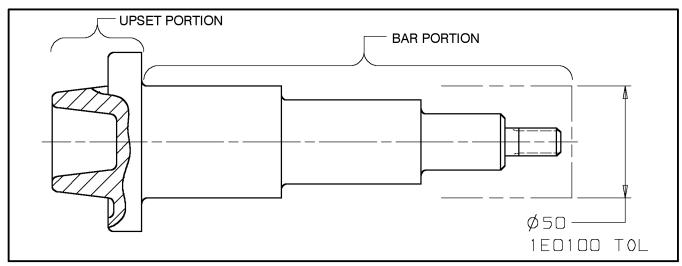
1E0100 Tolerance Upset Forging
